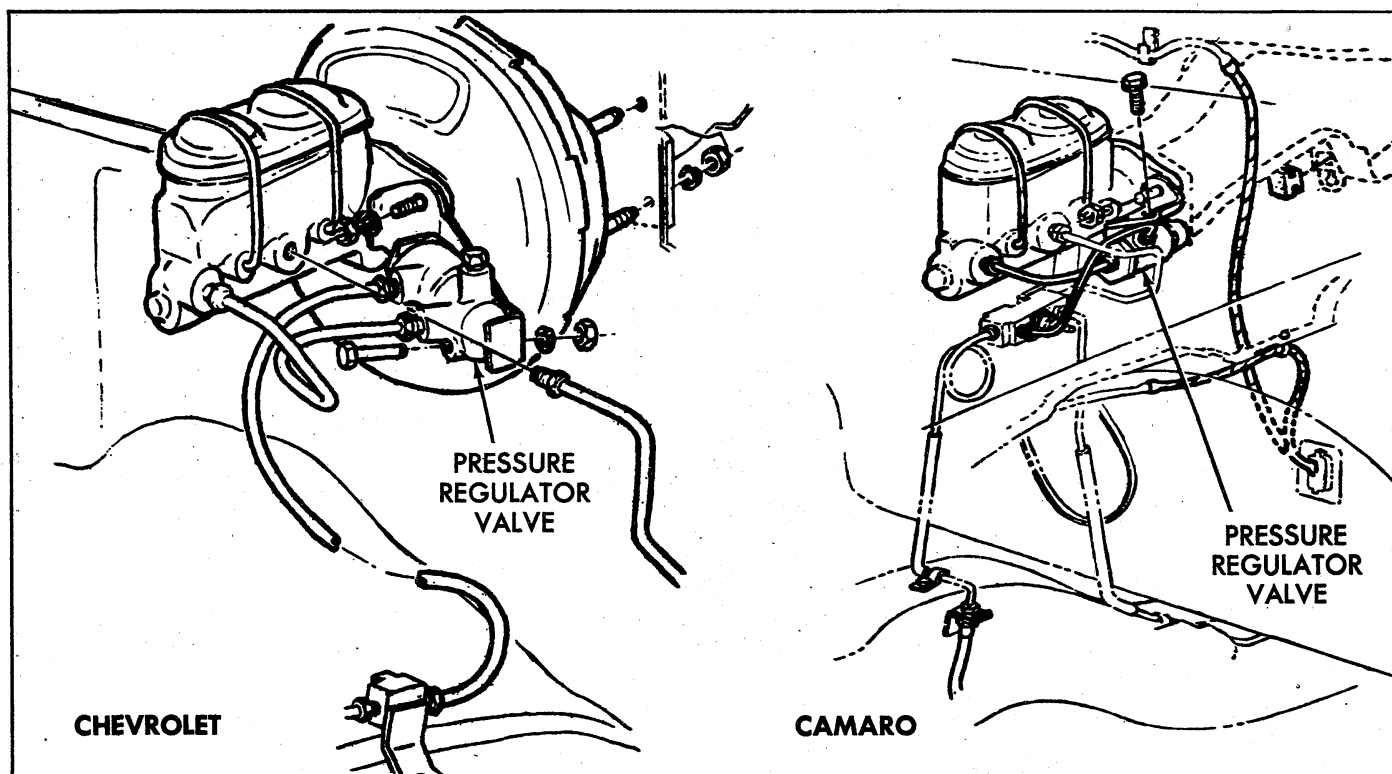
Pressure Regulator Valve—Chevrolet and Camaro Shown
